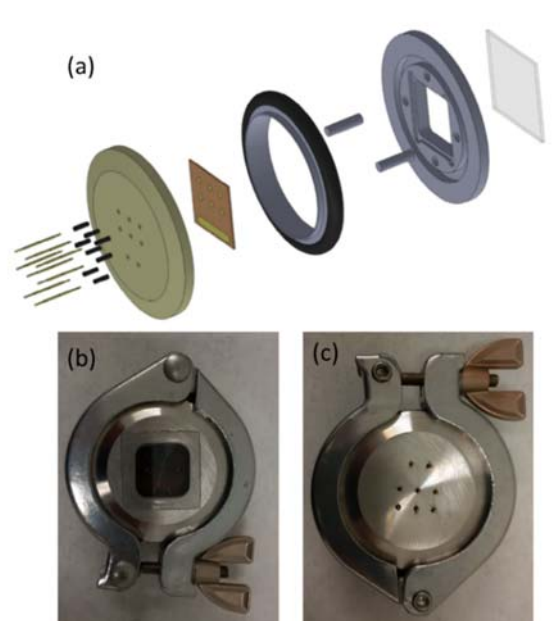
(a) Exploded view of the schematic of sealed measurement pack, (b) and (c) Photos of the sealed measurement pack used to characterize the air-sensitive devices.
